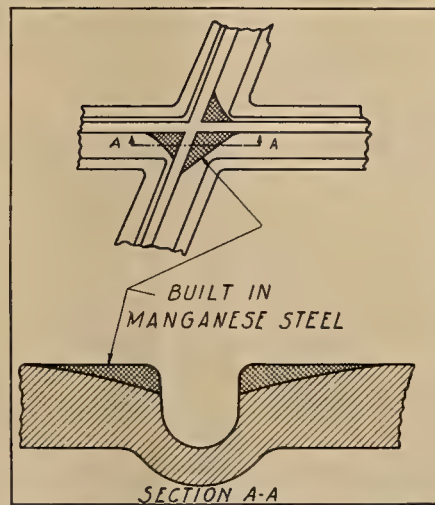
Sketch of a manganese-steel crossing with the worn points built up by the electric welding process.
